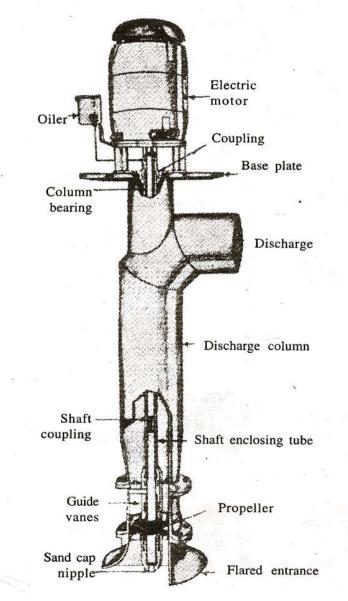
Propeller pump with the propeller and lower shaft assembly exposed
